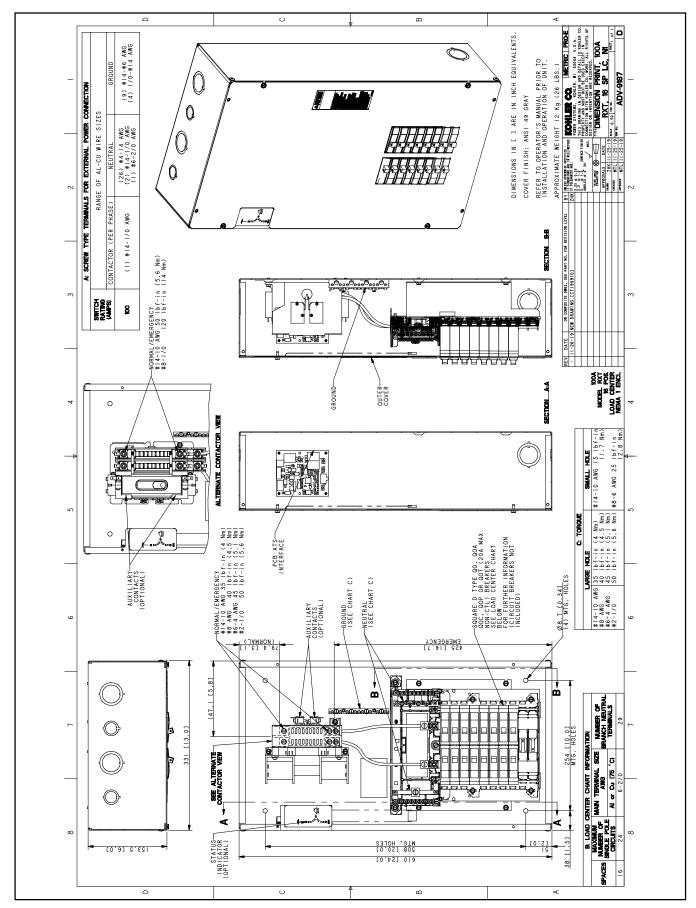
Enclosure Dimensions, 100 Amp NEMA 1 with 16-Space Load Center, ADV-9187
